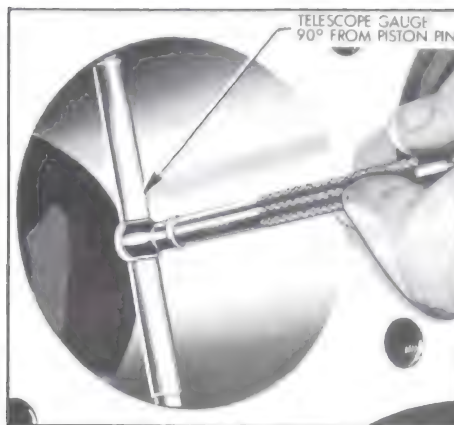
Using Telescope Gauge in Cylinder Bore
